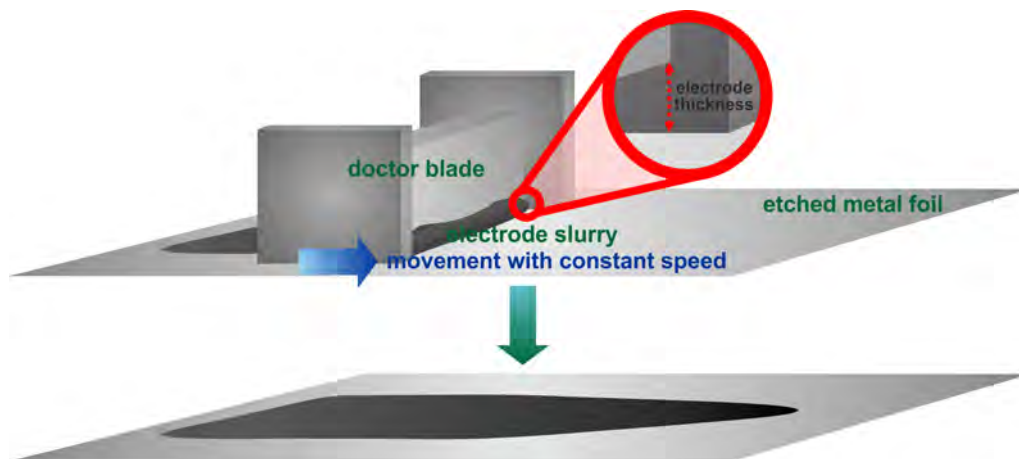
Schematic sketch showing the doctor blade process for production of technical electrodes. The electrode slurry is placed in front of the doctor blade, which moves with constant, defined speed over the metal foil. The thickness of the deposited layer is adjusted by variation of the gap between the middle part of the doctor blade and the foil.
